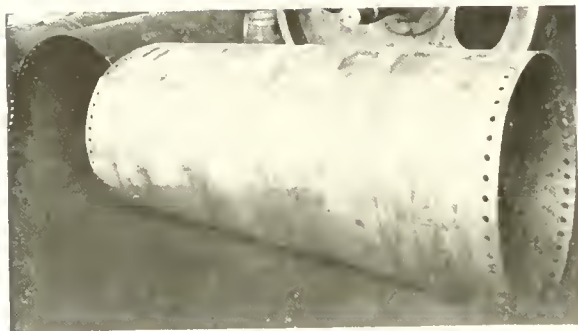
Owing to lack of material plates of sufficient size could not be secured for this job. Four smaller plates were therefore welded together with the electric arc, saving long delay.
